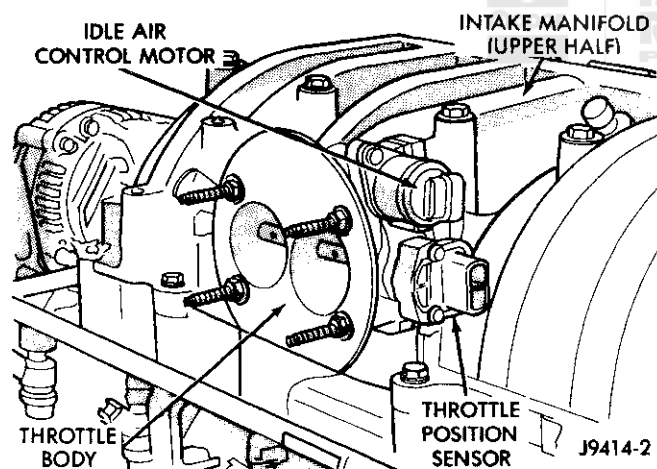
Idle Air Control Motor Location—8.0L Engine
